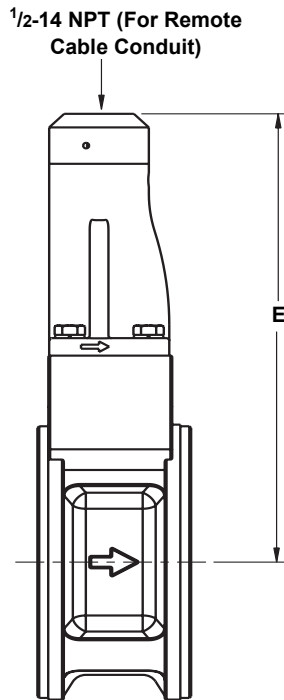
Dimensional Drawings for Remote Mount Transmitters
